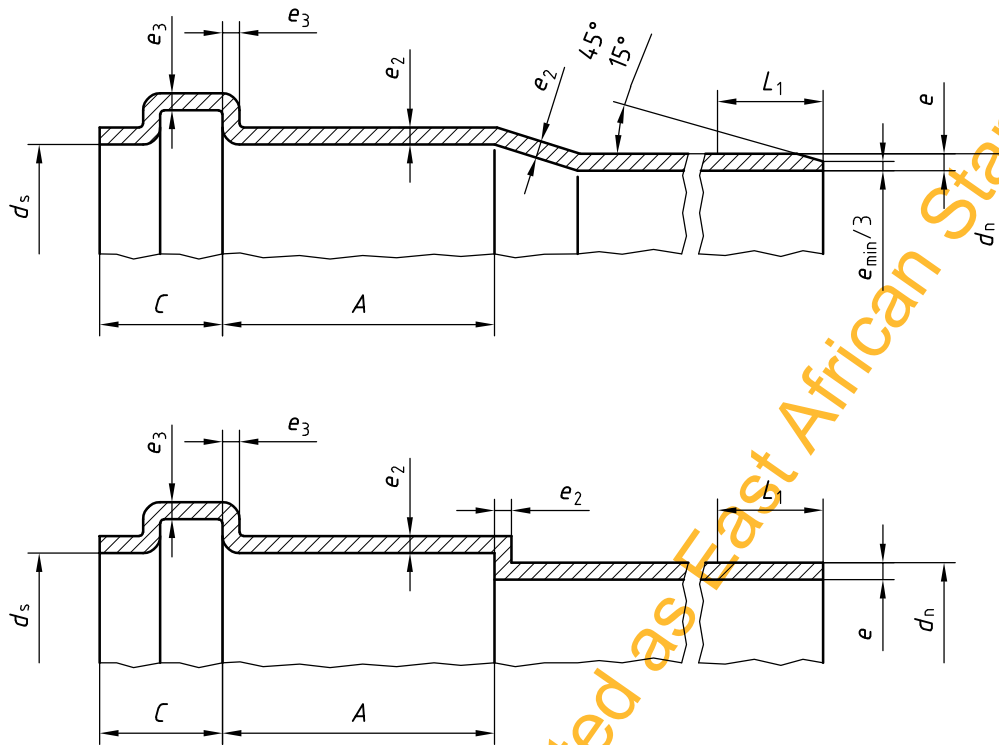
Dimensions of sockets and spigot ends for ring seal joints
